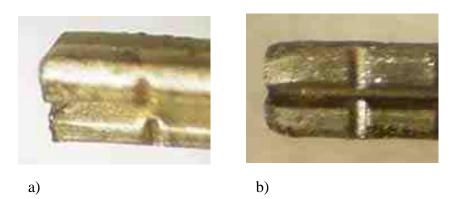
Tip view of titanium medical clip samples: a) before and b) after barrel deburring using ECF.
